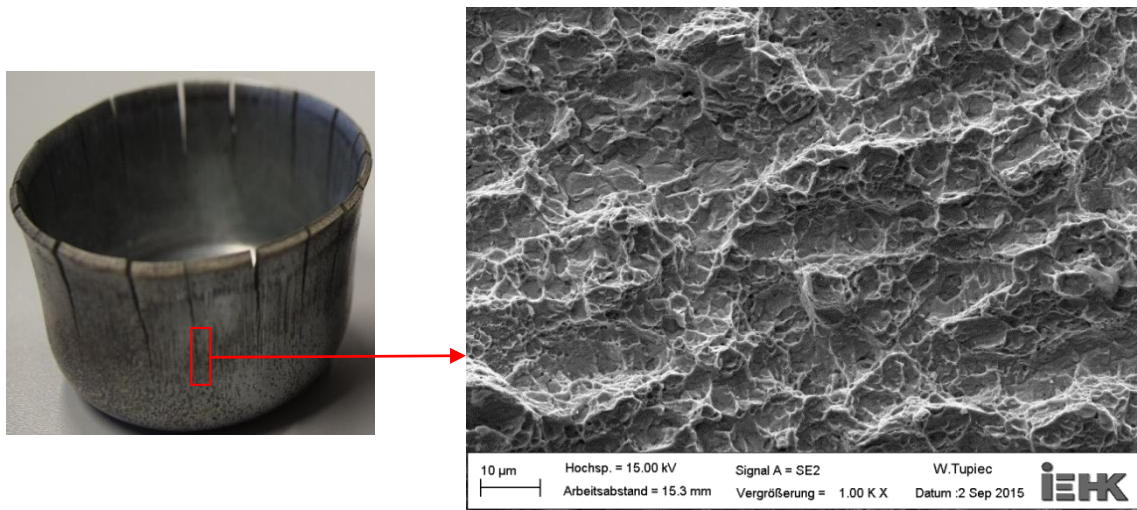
Fracture surface of TWIP steel X60Mn22 in uncharged condition after deep drawing test.
